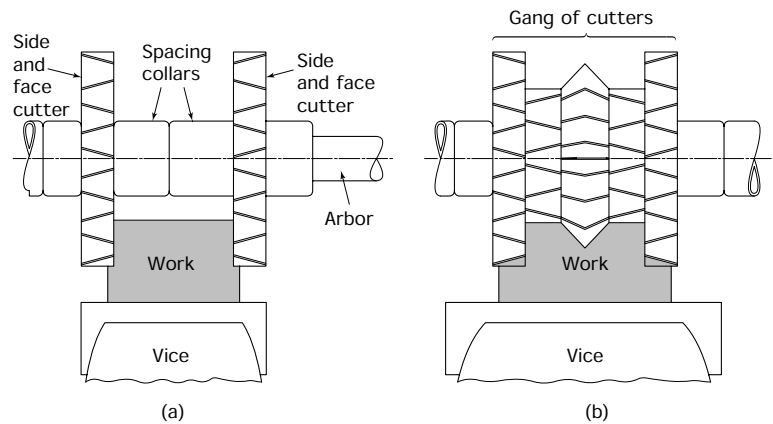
Straddle and gang milling: (a) straddle milling; (b) gang milling
